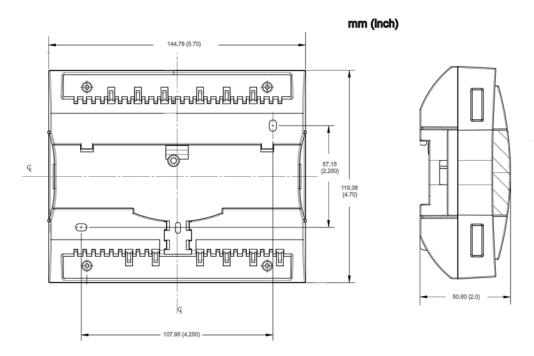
LN-IO301-1 Module Dimensions, mm (in.)
